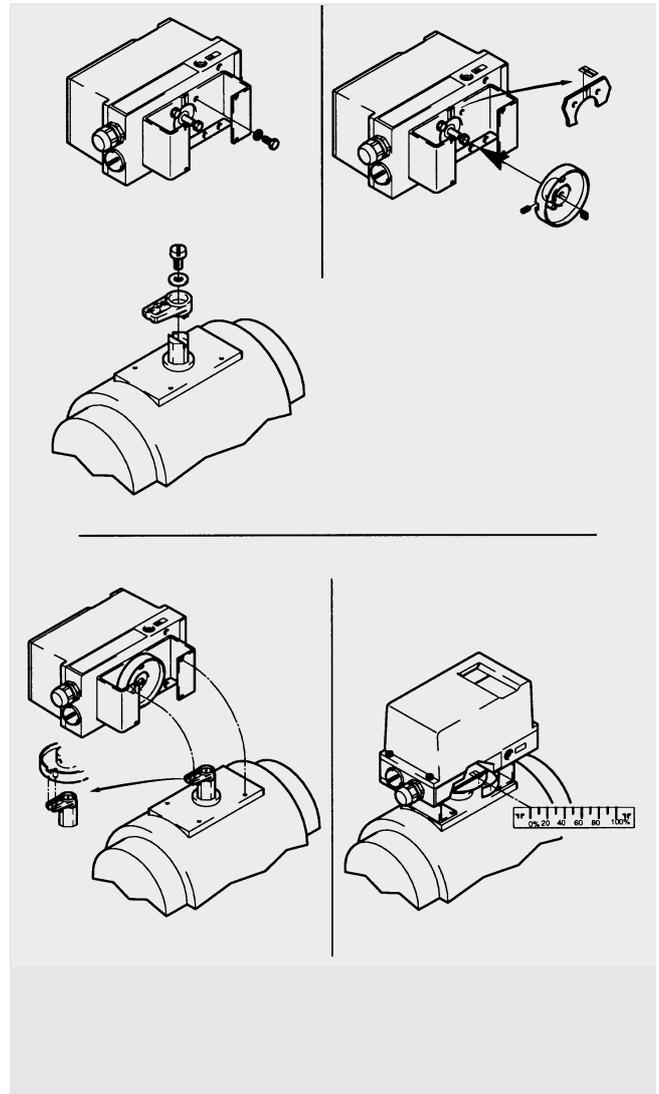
/17 Mounting of SIPART PS2 (PA) on part-turn actuators
